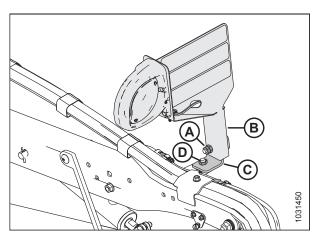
Right Light Assembly in Shipping Position – D1XL Series Headers
